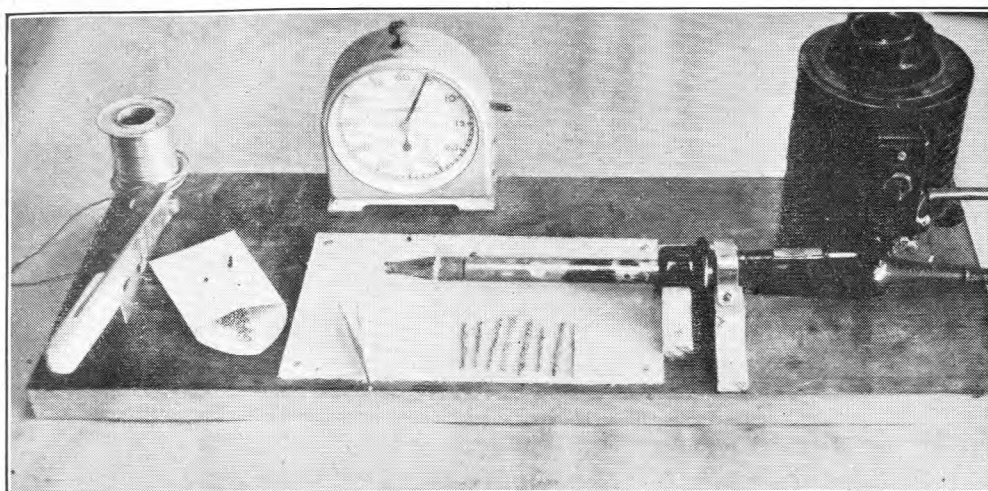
LAYOUT OF EQUIPMENT FOR SOLDERABILITY TESTS ON TAGS.
